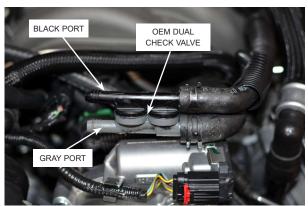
r: Dual Check Valve Assembly (Hoses Removed)
